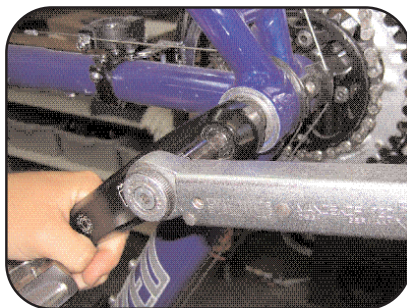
Tighten crank bolt with torque wrench to: 28-31 ft-lbs (38-42 N-m, 387-429 Kgf-cm)
